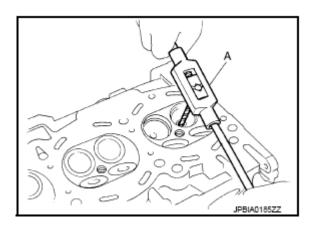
Reaming Cylinder Head Valve Guide (EXH) Hole Using Valve Guide Reamer Courtesy of NISSAN NORTH AMERICA, INC.
